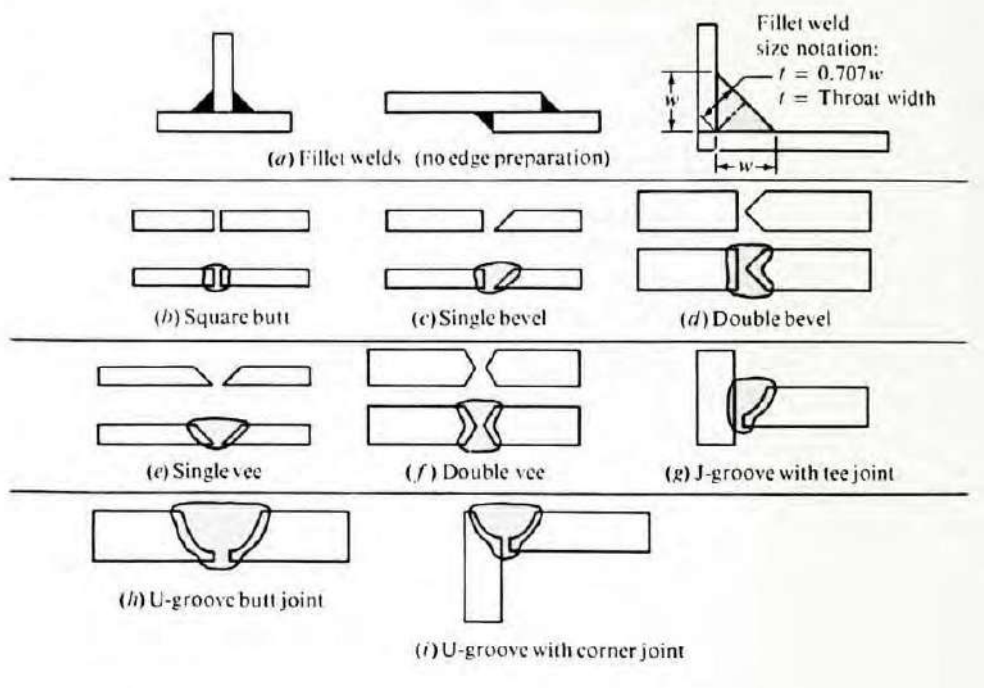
Some types of welds showing edge preparation
